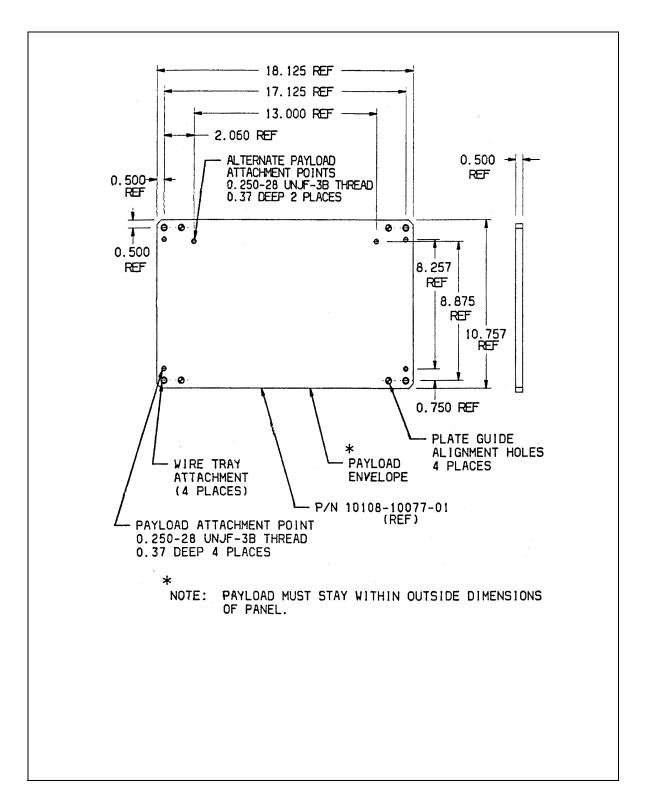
PAYLOAD MOUNTING PANEL (SHEET 2 OF 2)
